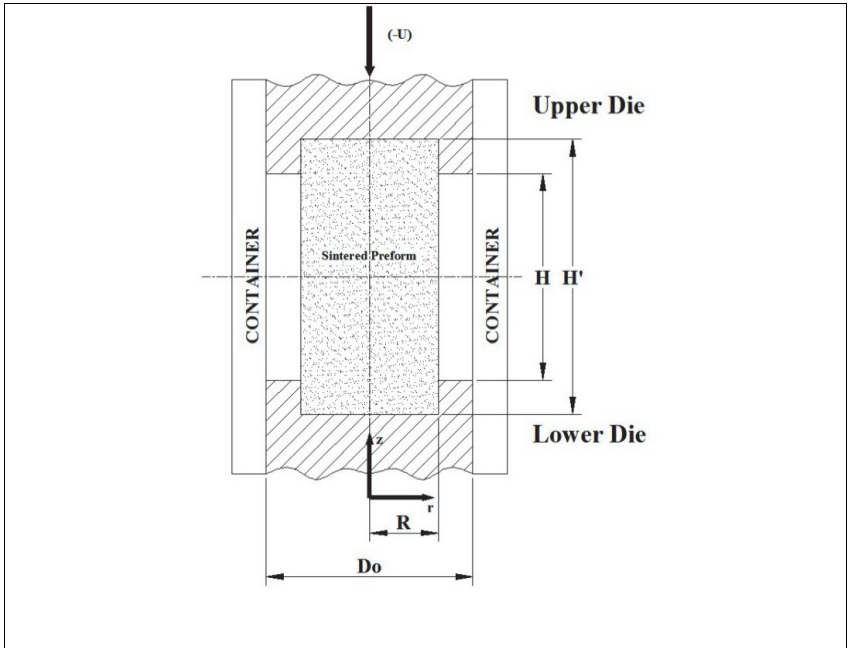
Schematic diagram of Closed-die Sinter-Forging of Double-Hub Flange Preform with Upper Die, Container, Preform and Lower Die.
